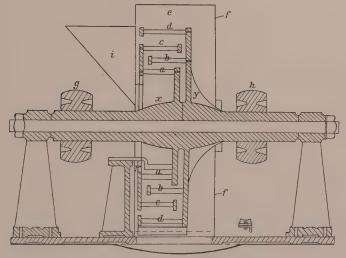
Coal disintegrator or crusher for reducing coal to uniform size.
